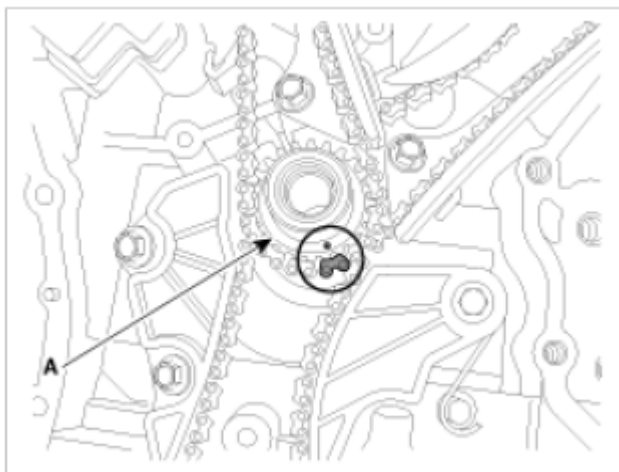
Identifying Timing Mark On Crankshaft Sprocket
